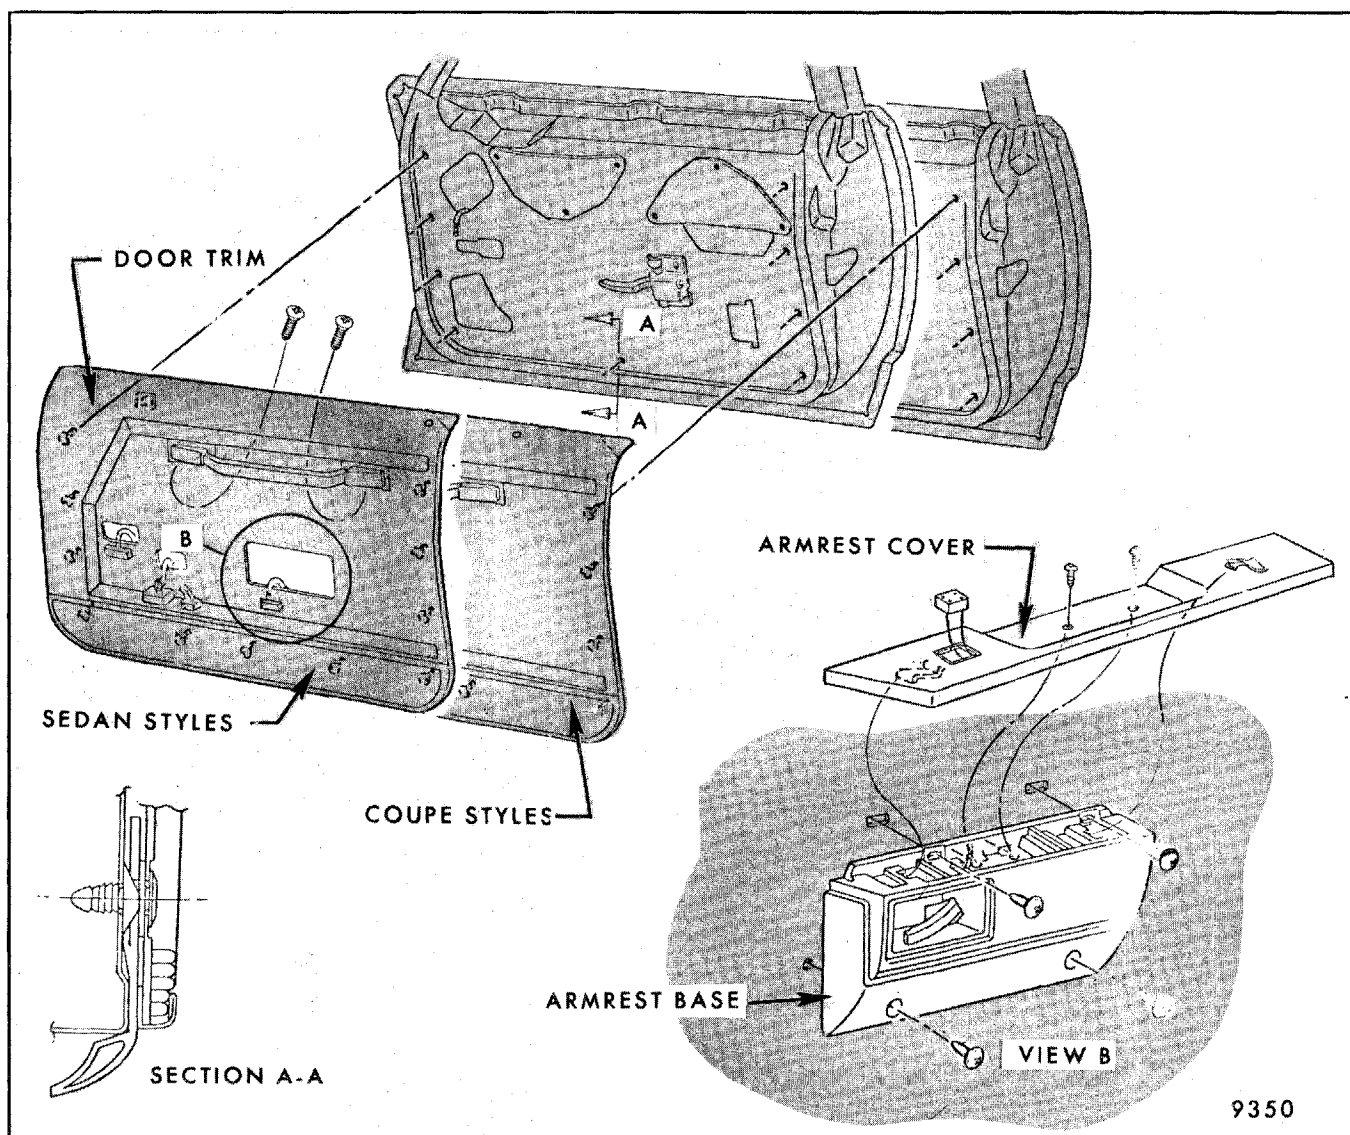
Door Armrest and Trim Panel Attachment - "B" Less 4BZ37 Styles
